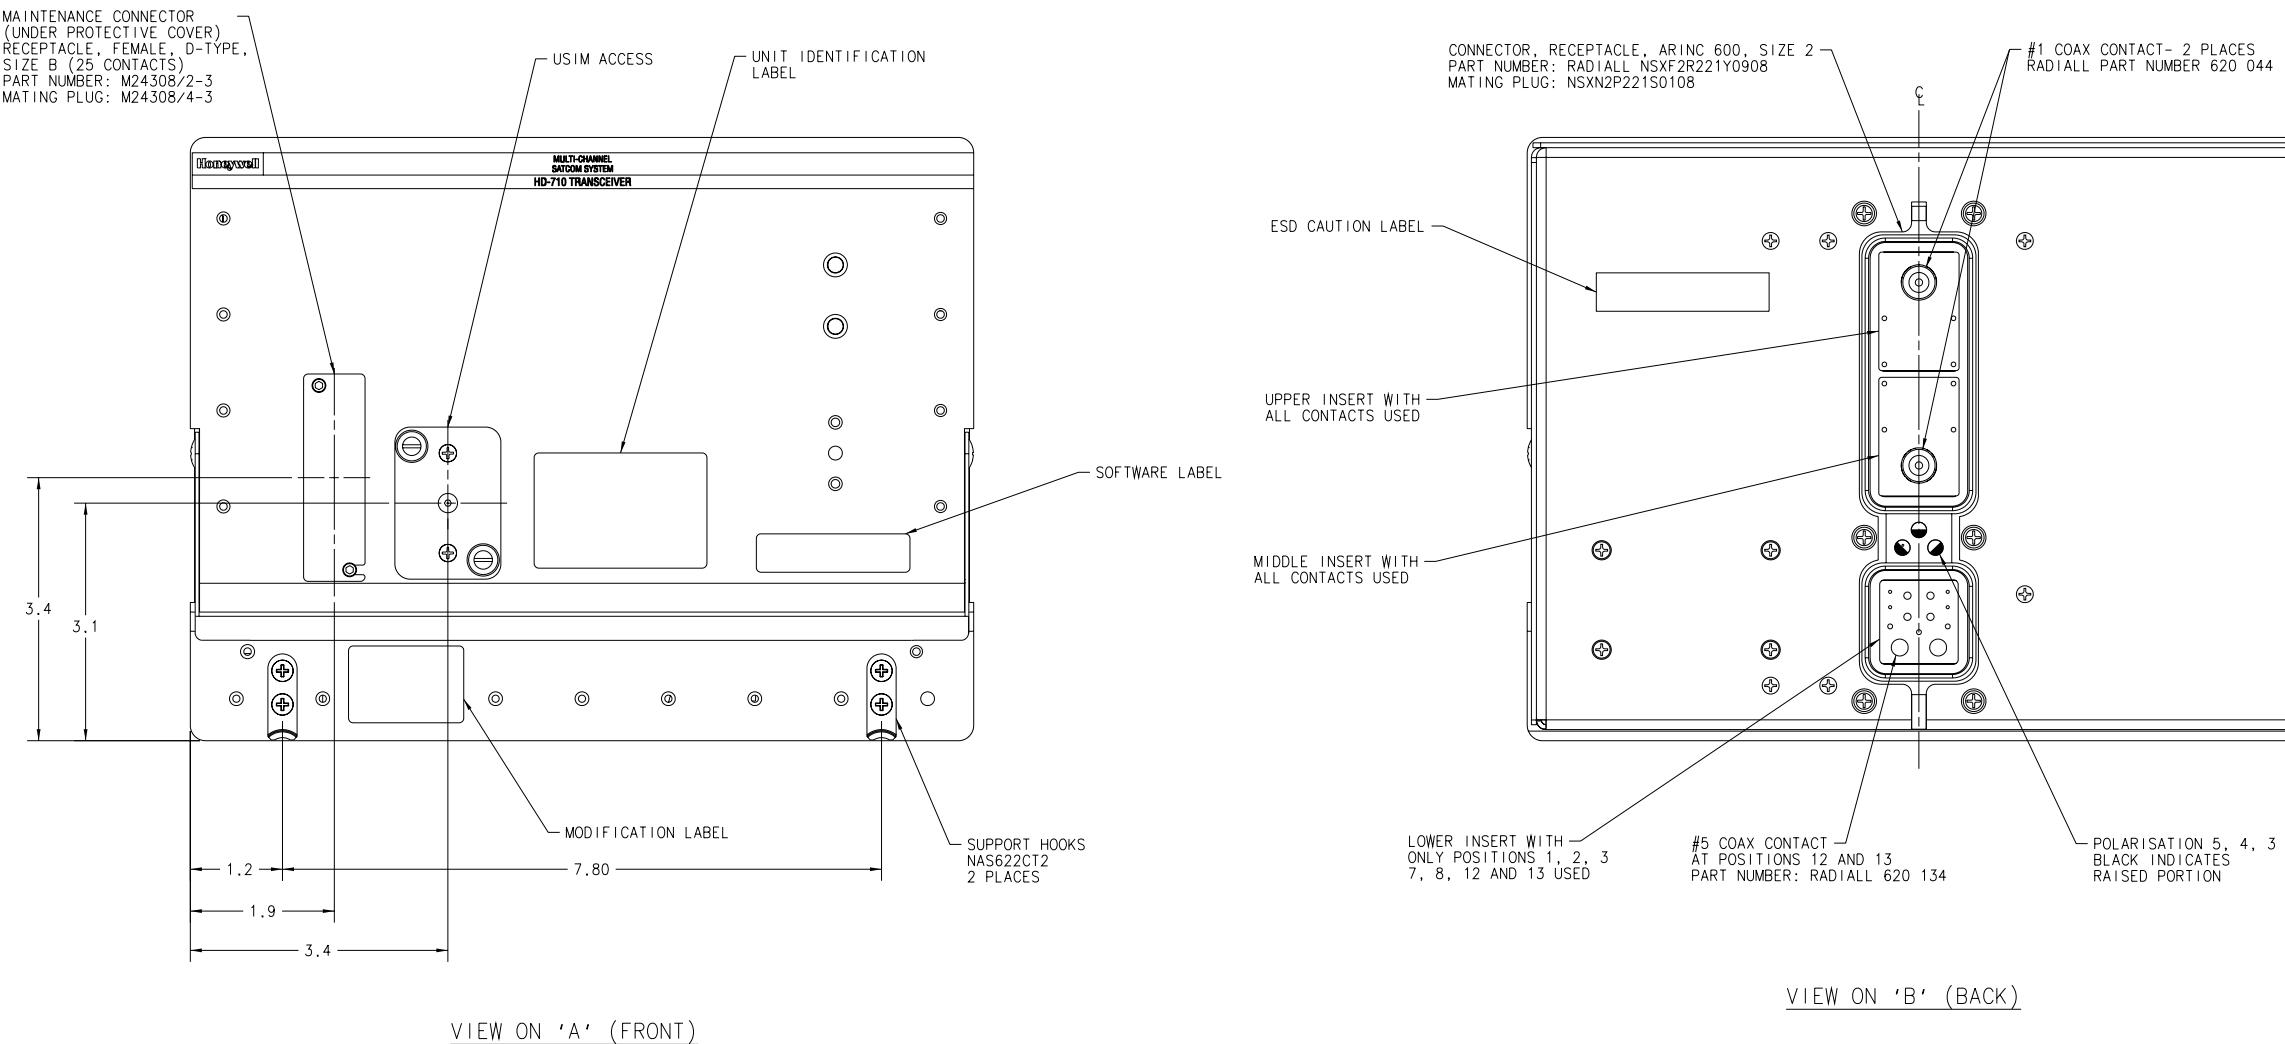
(Sheet 2). HD-710 Terminal Outline and Installation Drawing (1252-E-3600, Rev A)
